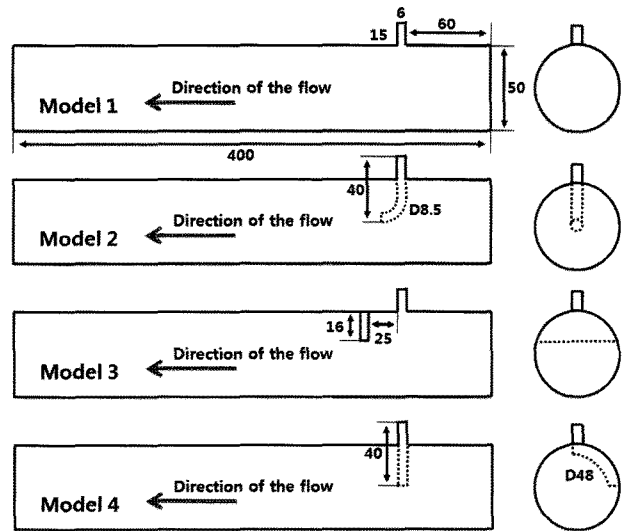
Four models in mixing section of water and chemicals (unit : mm).
